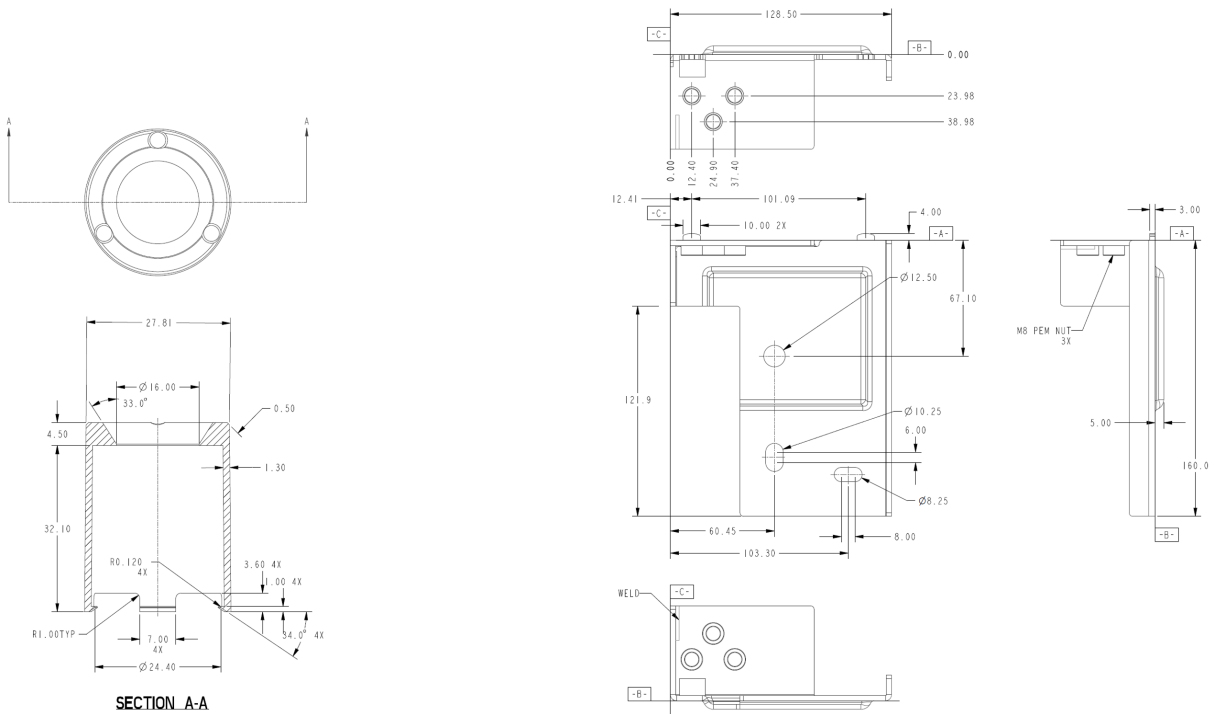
MGX Rack Manifold Drawing – Manifold Top and Bottom Mounting Brackets
